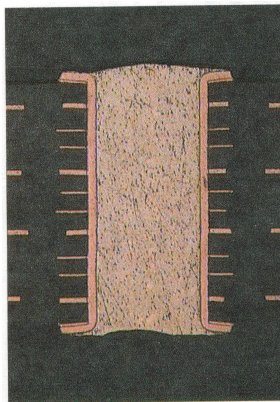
Cross section of a via in the sample PCB of the designed stack-up.
